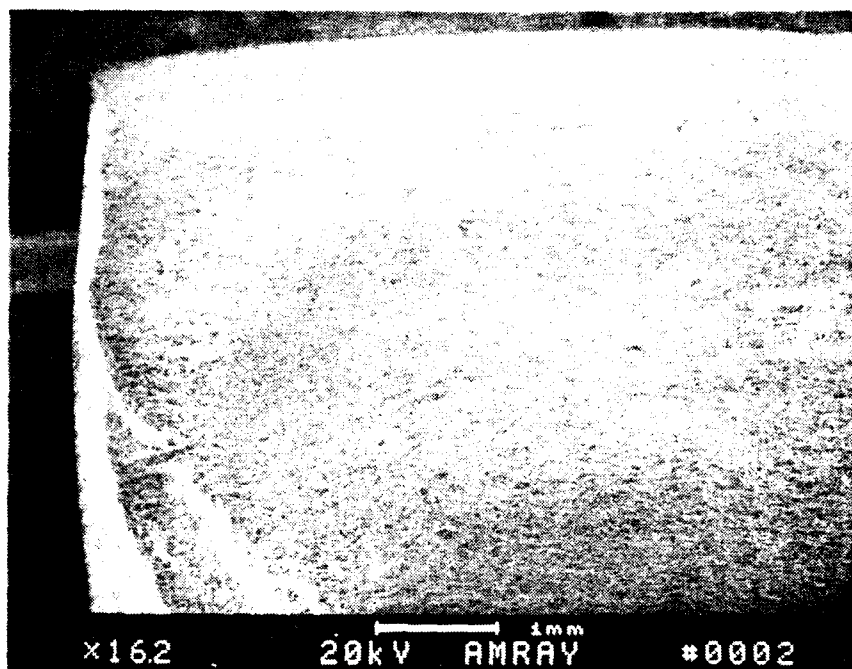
Fracture surfaces of peak-aged L-T bend specimens. (a) Al-3Li
